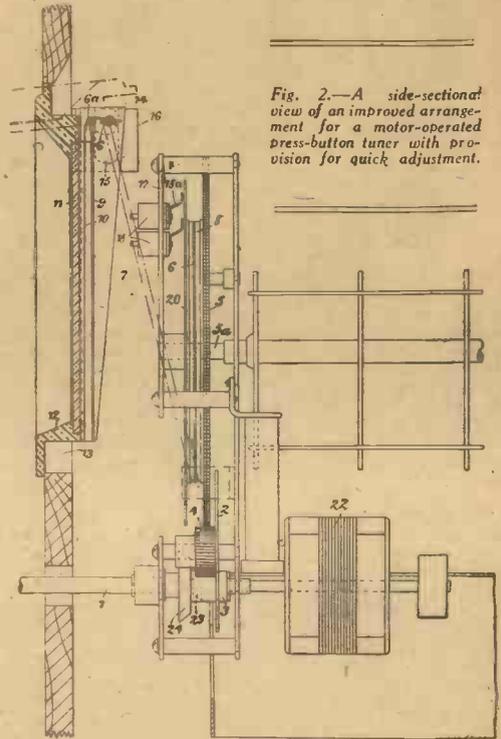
A side-sectional view of an improved arrangement for a motor-operated press-button tuner with provision for quick adjustment.
